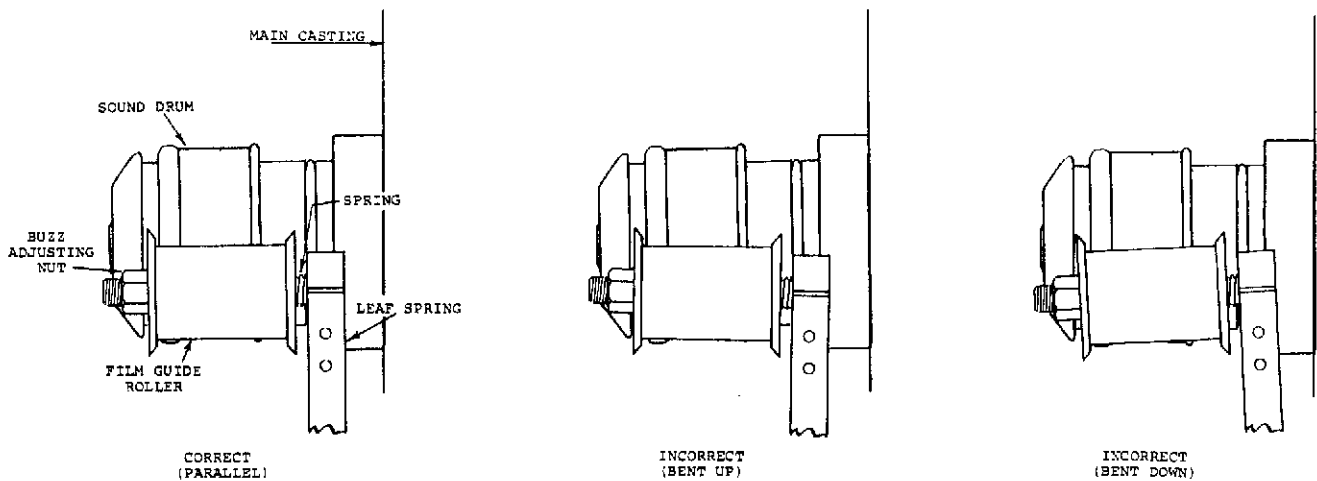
FILM GUIDE ROLLER ADJUSTMENT
